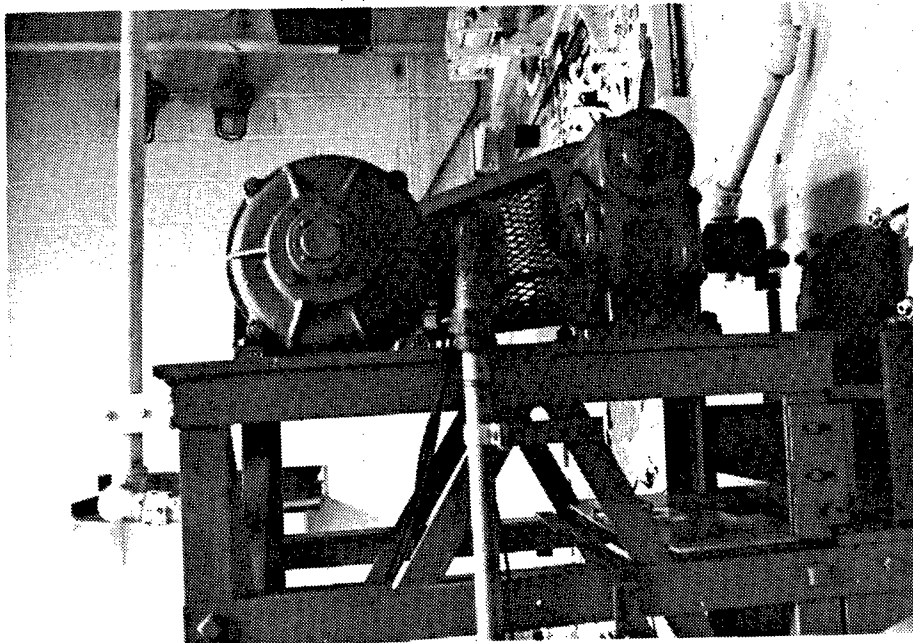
Building 9309-04: De-thread machine manufactured by Foote Brothers Gear and Machine Company.
